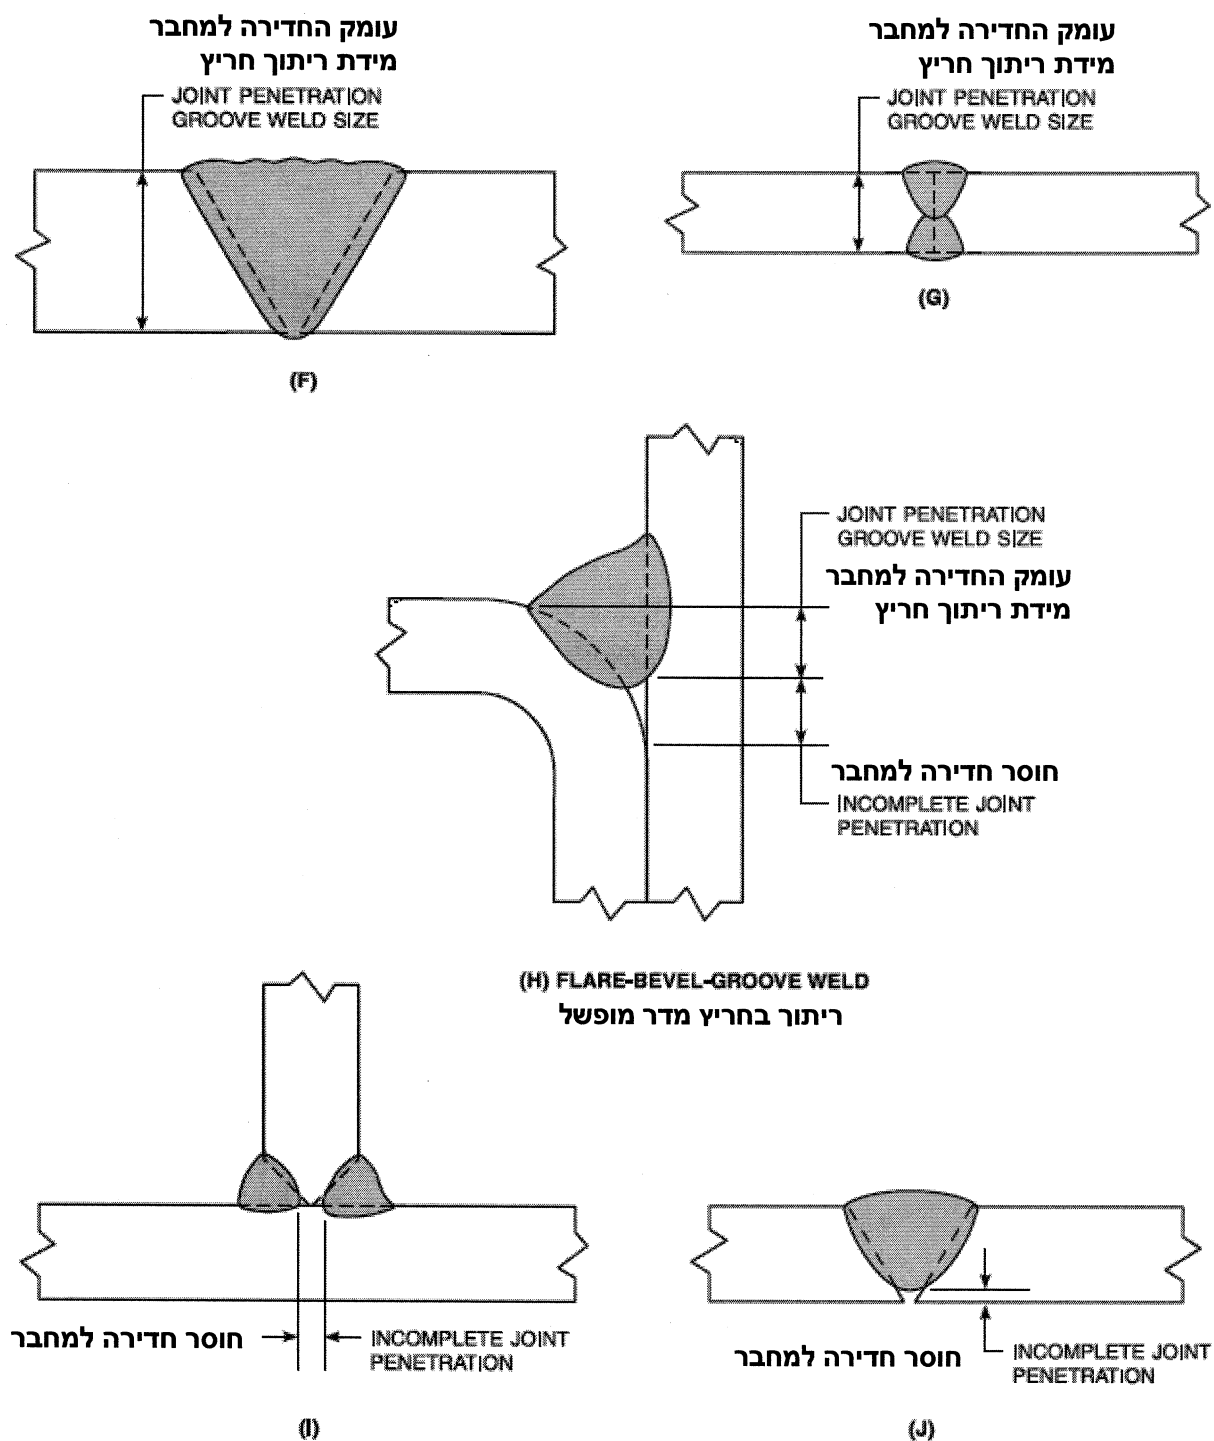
(Continued)—Groove Weld Size and Joint Penetration
